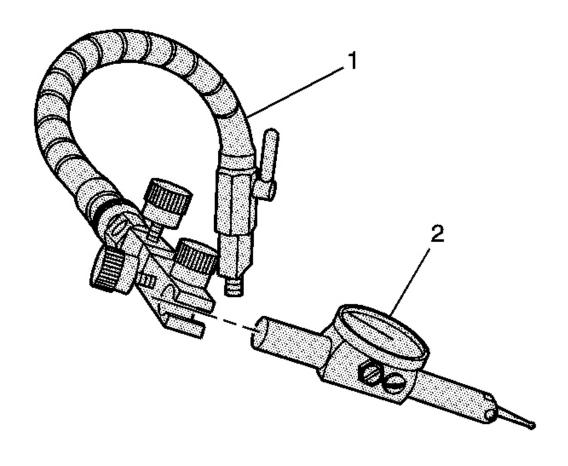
View Of Swivel Base & Dial Indicator Courtesy of GENERAL MOTORS CORP.
